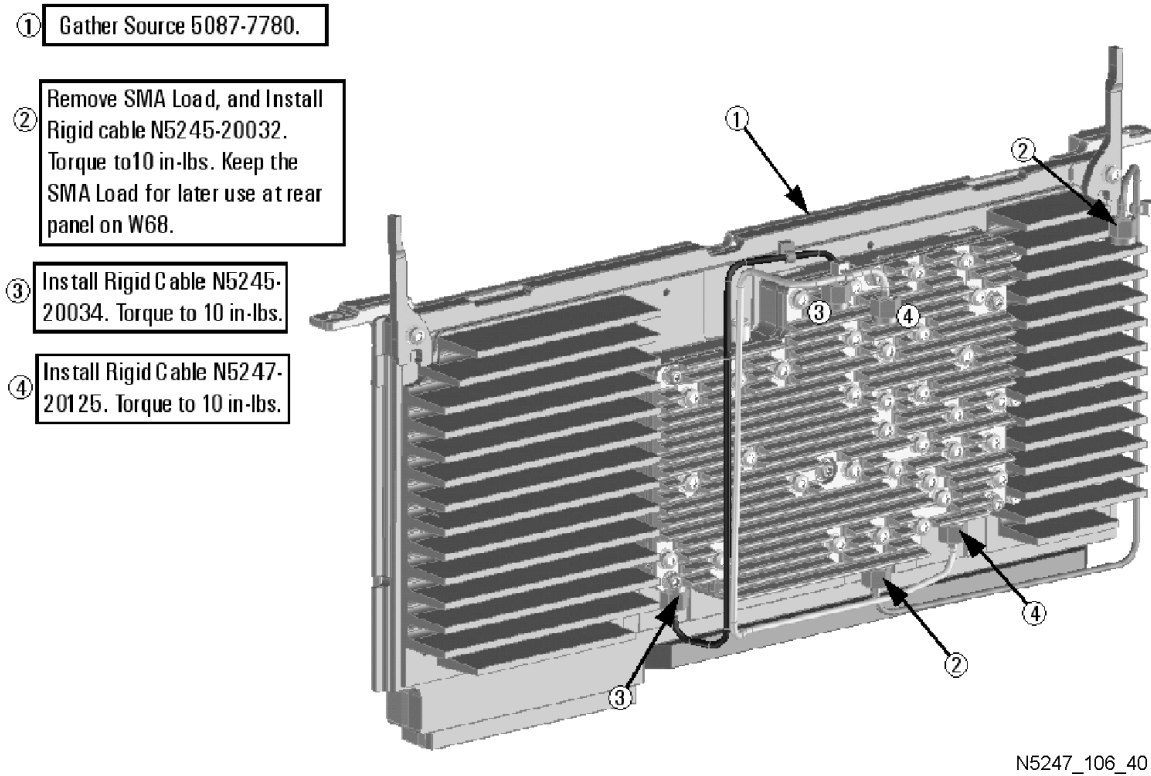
A10 Source 2 Assembly Bracket Installation (0515-0375, 0515-0666, 0515-2078, 5087-7780, N5247-20136)
